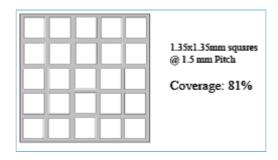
Exposed/Ground pad stencil design recommendation for QFN package
